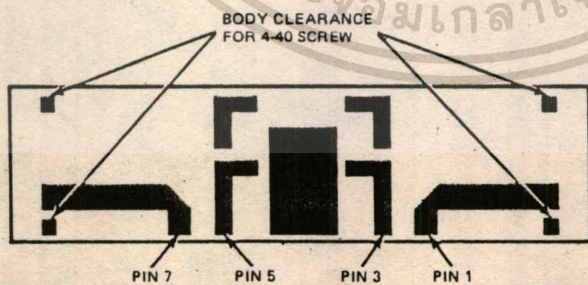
UHF POWER MODULE TEST FIXTURE PRINTED CIRCUIT BOARD
